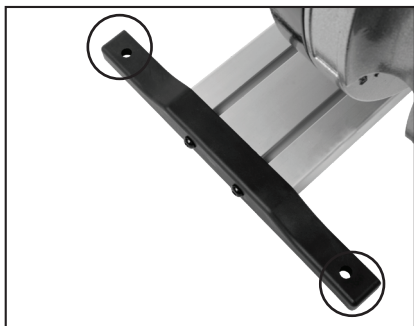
Use Mounting Holes to Attach Bender to Fixture
